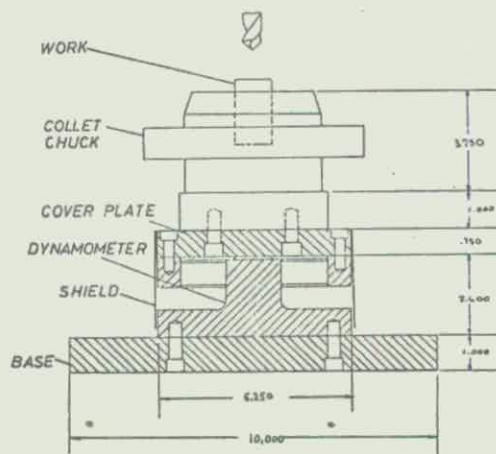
Schematic illustration of dynamometer and workpiece holder
